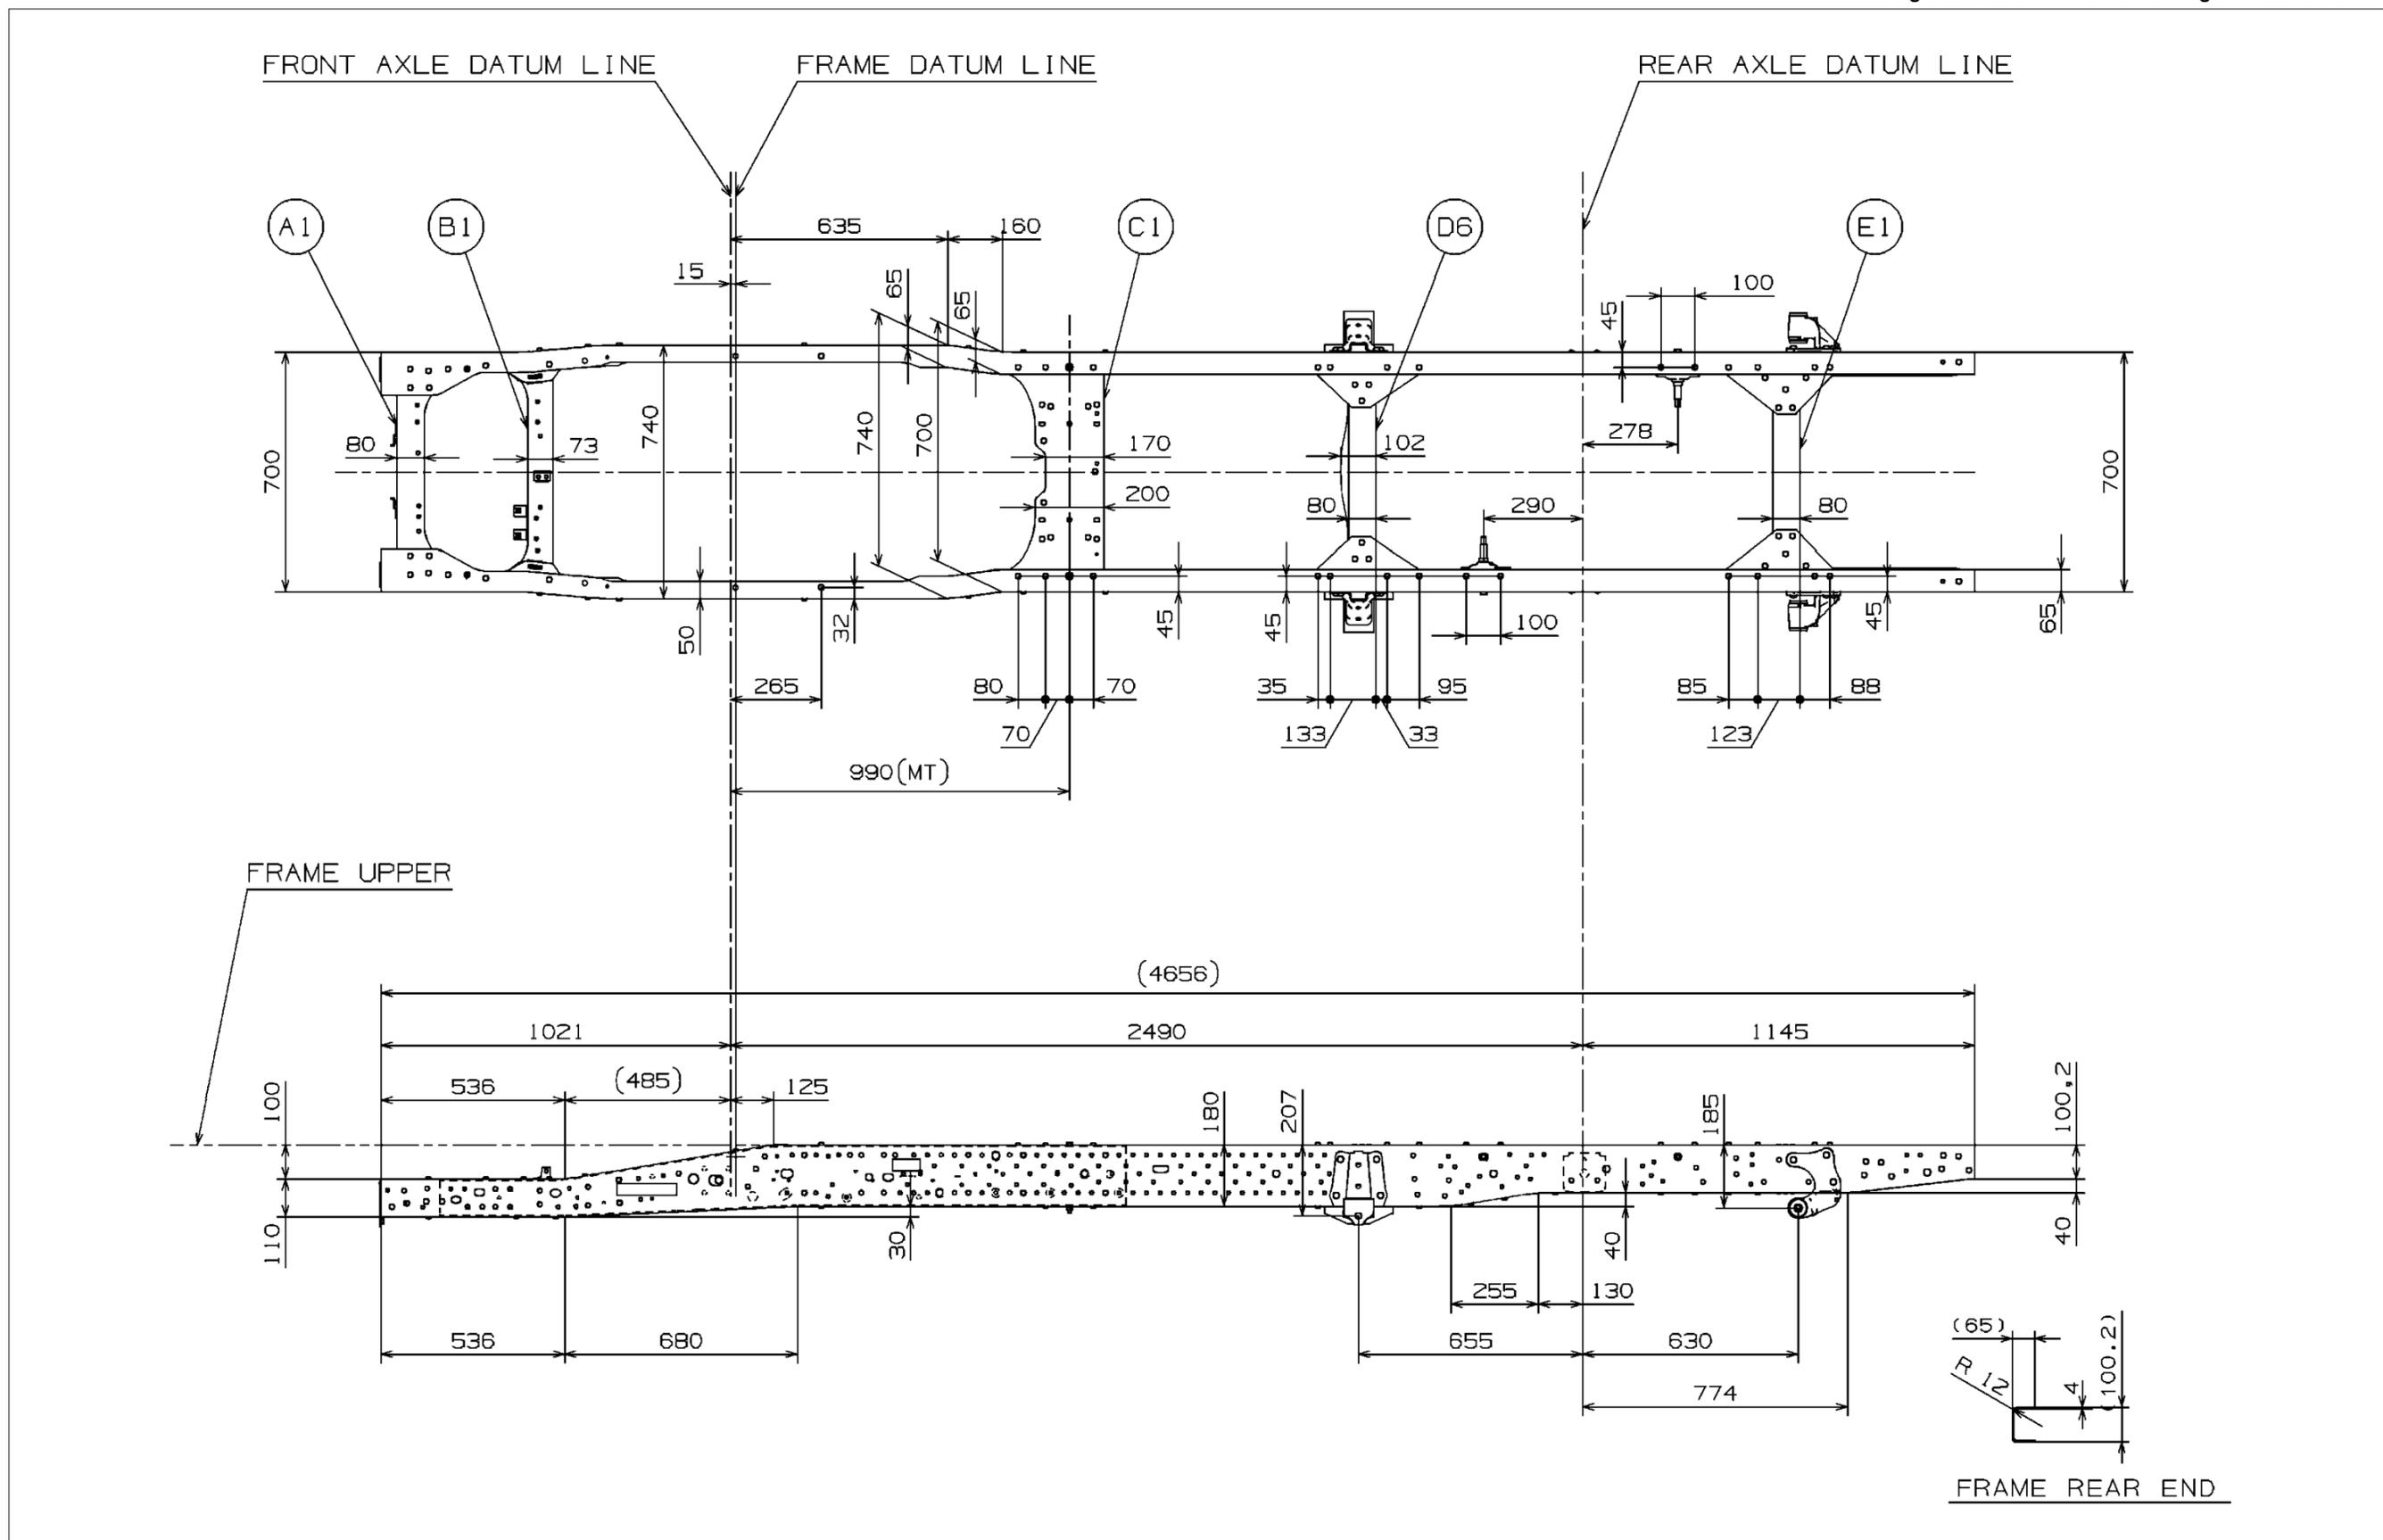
Chassis Frame Drawing NLR85L/U-ED5AYEN
